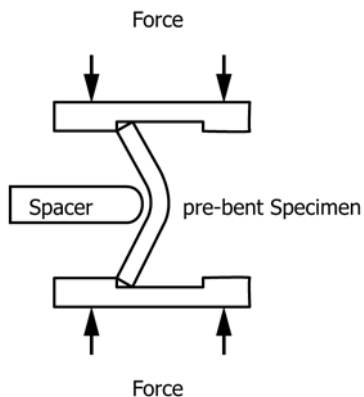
Schematic Fixture for Completing the Guided-bend Test Started as Shown in Fig. 2
